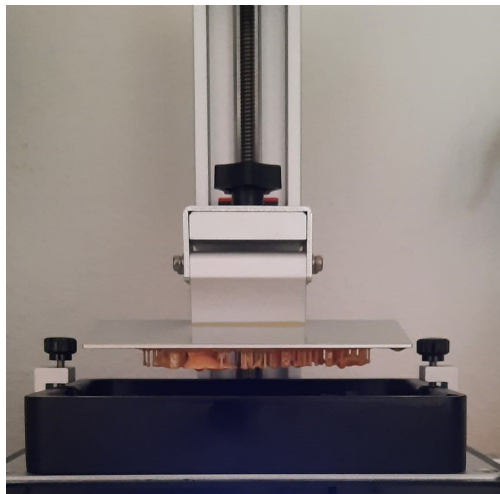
Resin printer Model is printed sheet for sheet via laser curing of photopolymer.
